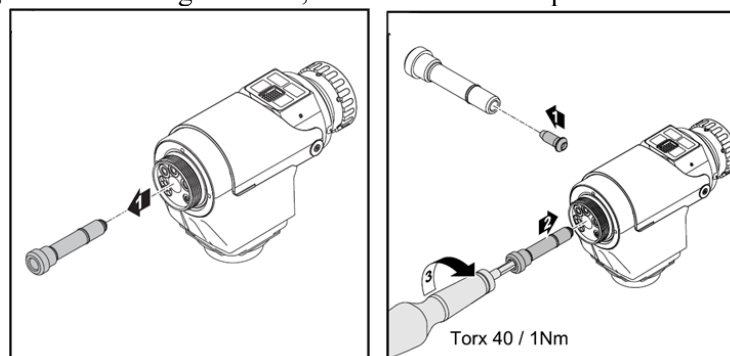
(c) Taking out of the front liner guide tube
